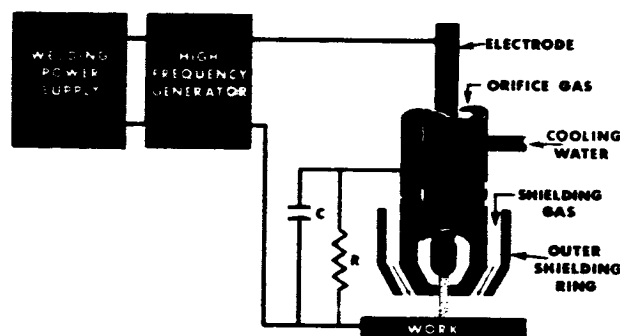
PLASMA ARC WELDING (REF. 54)
